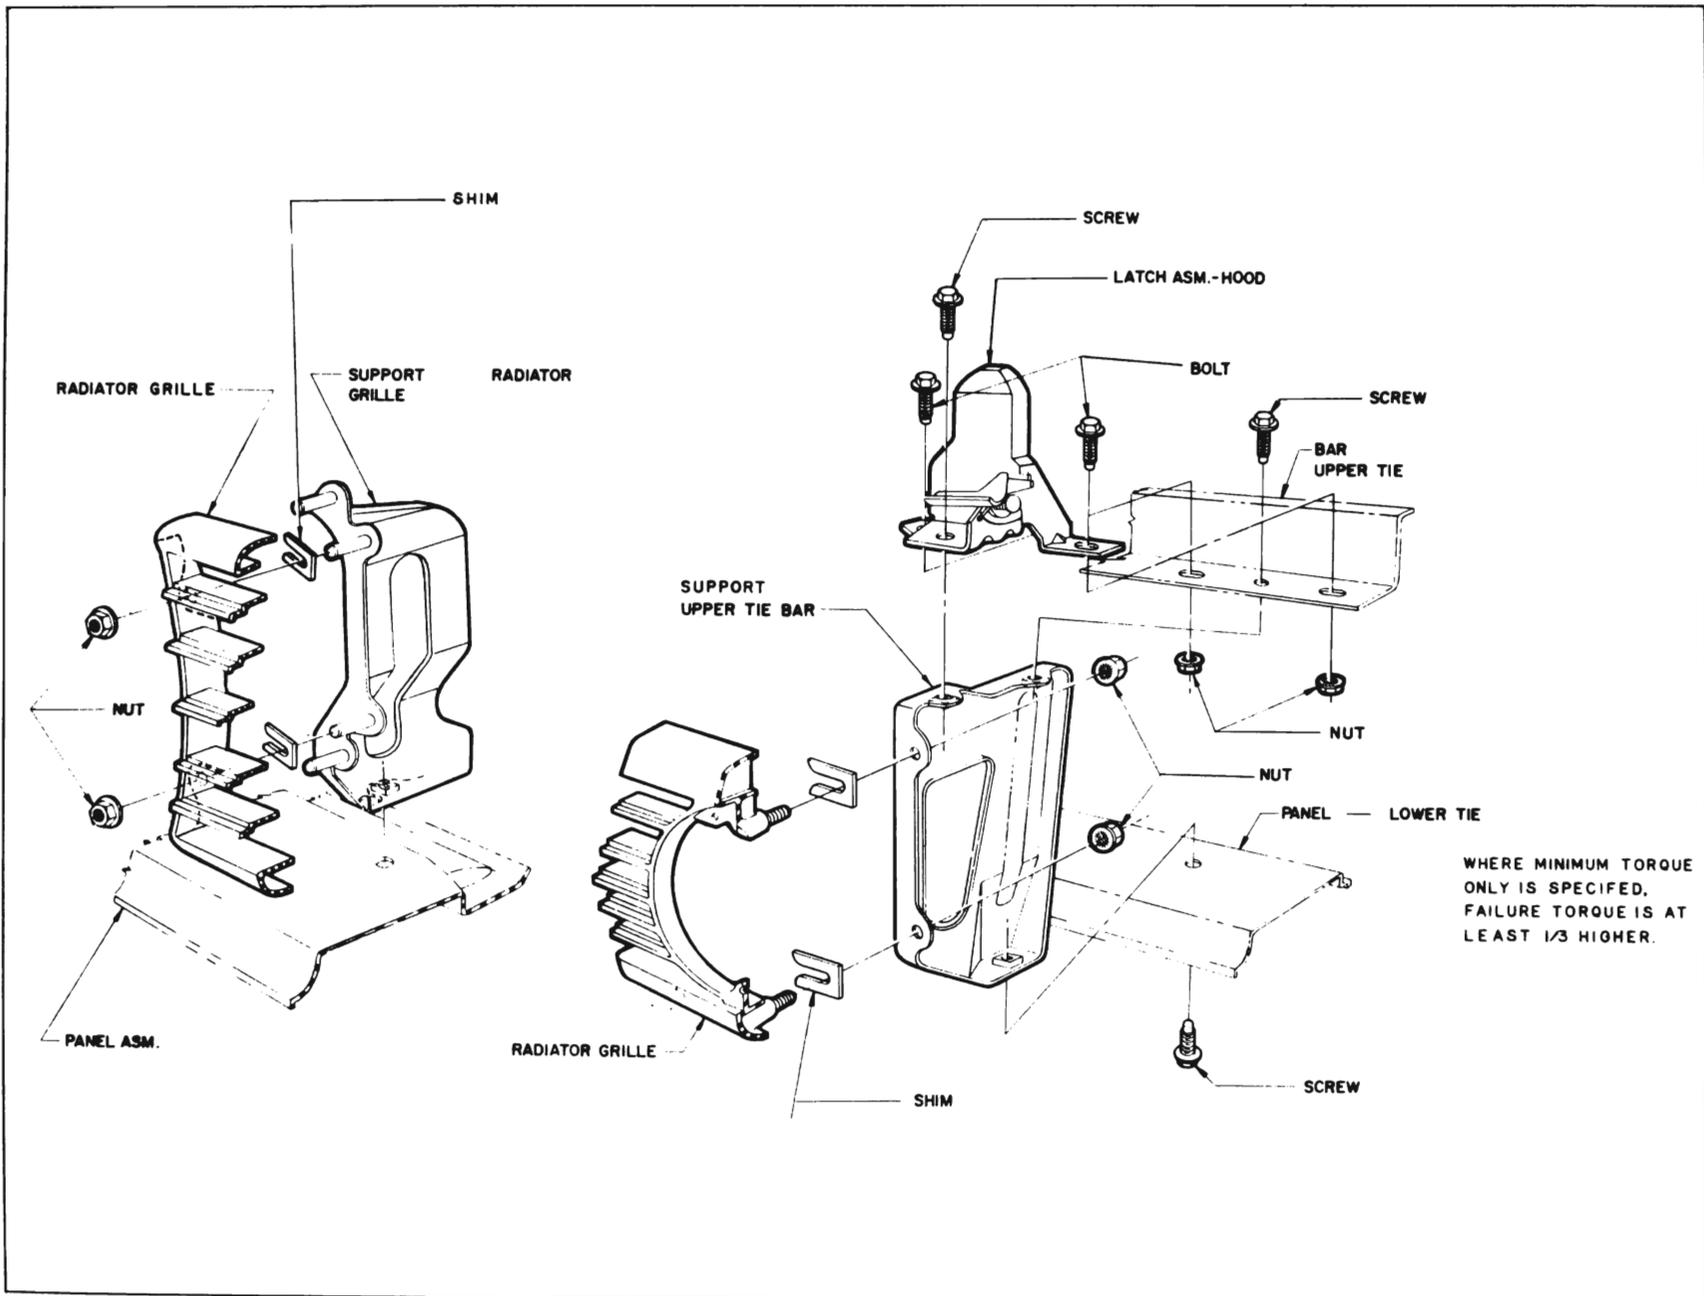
Radiator, Grille Assembly—4400-4600-4800 Series
